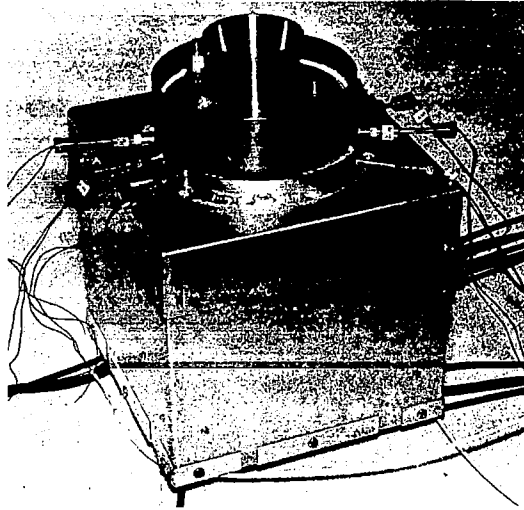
LINJET ENGINE ASSEMBLY
